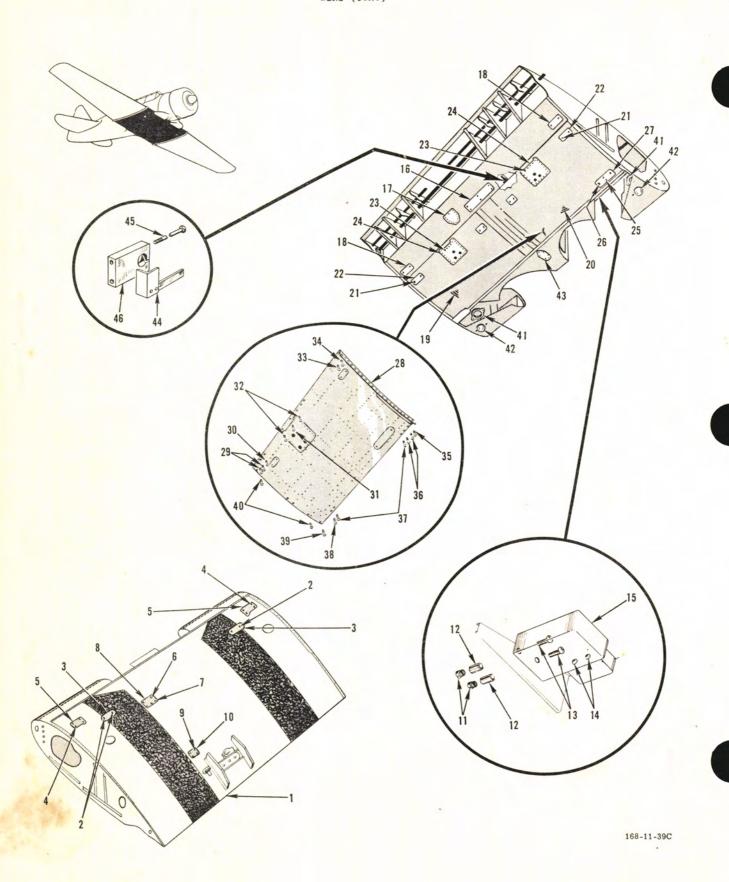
WING CENTER SECTION ASSEMBLY
